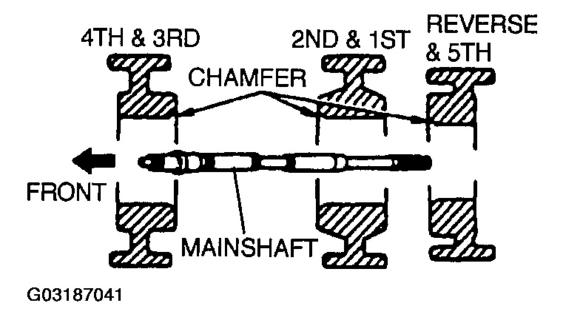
Identifying Synchronizer Rings Courtesy of MAZDA MOTORS CORP.
